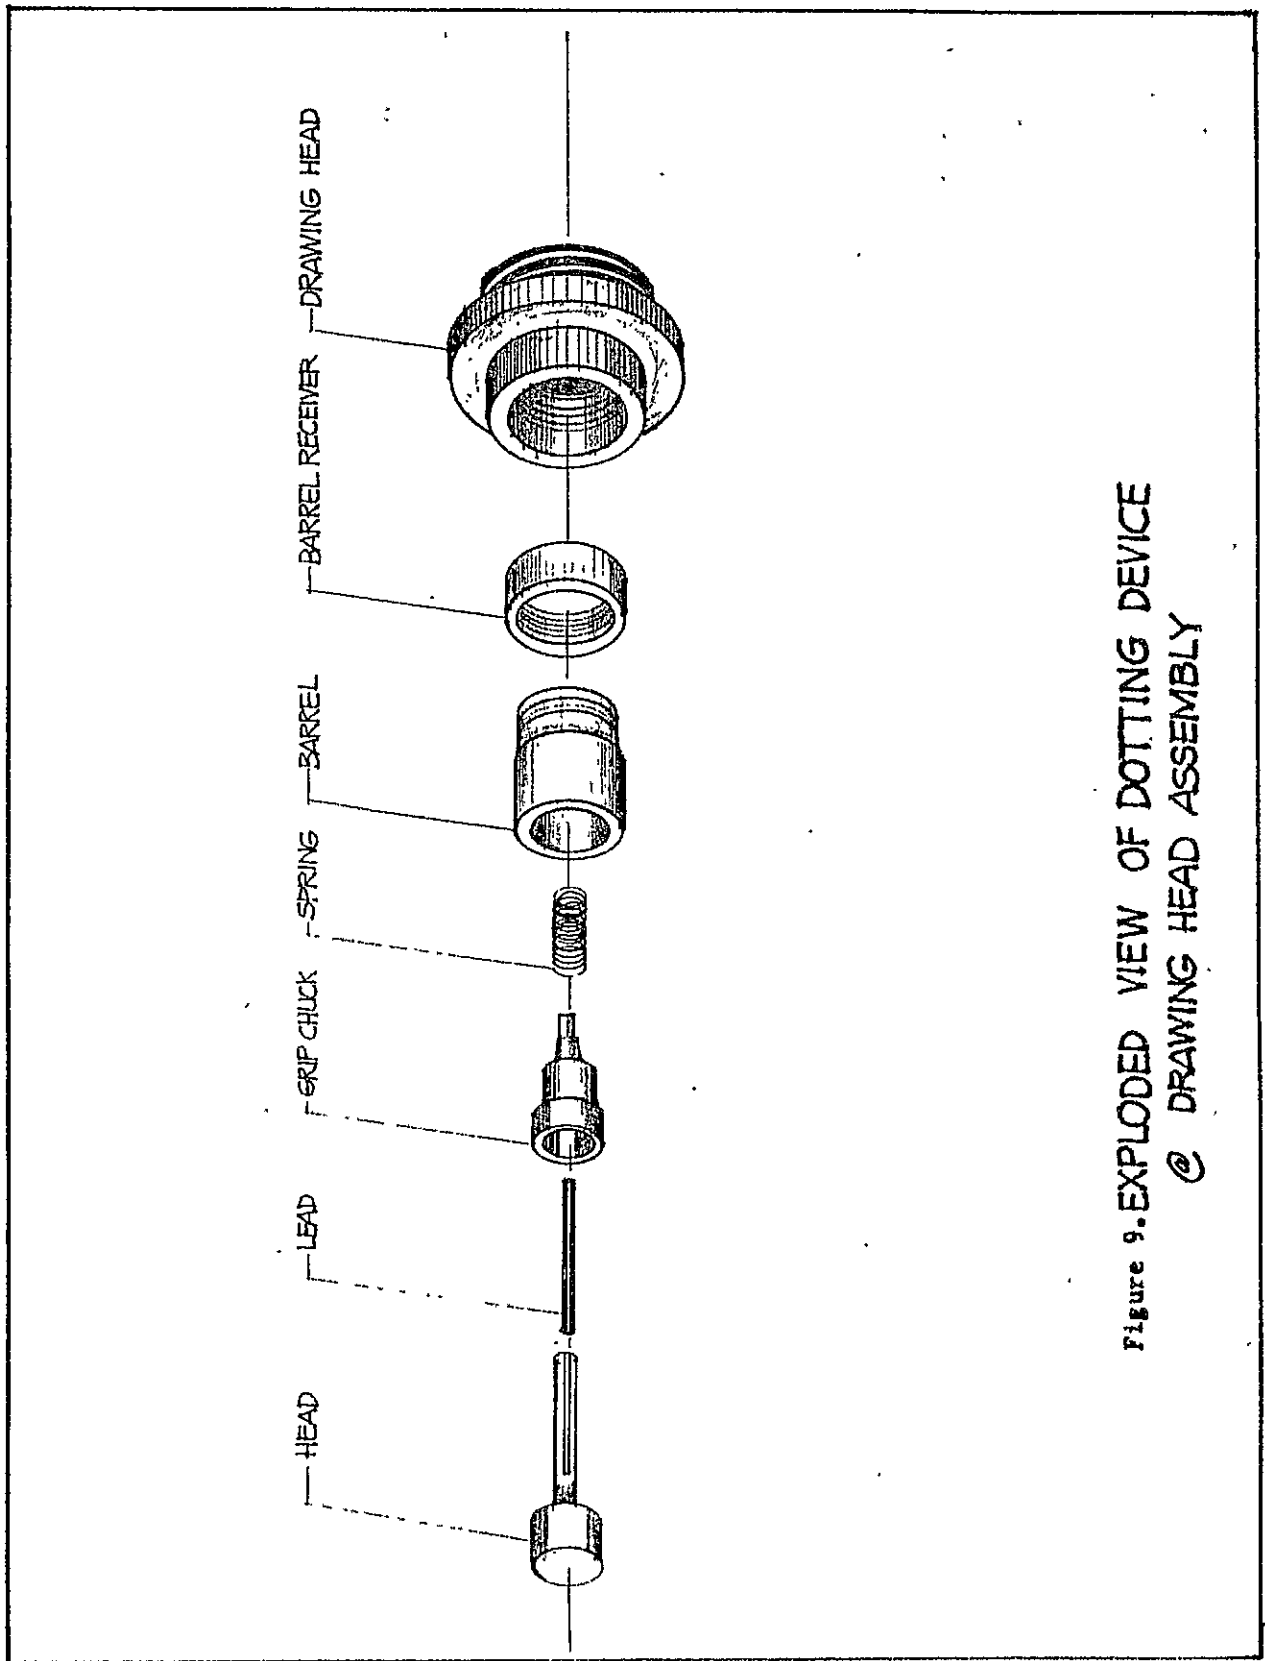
EXPLODED VIEW OF DOTTING DEVICE
